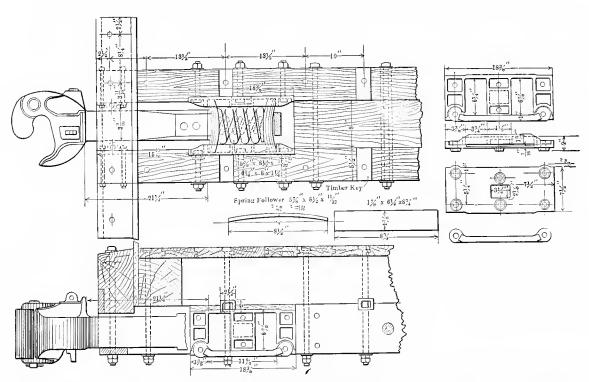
Hinson Single Spring Draft Gear with Spring Follower Plates for Freight Cars with Wooden Center Sills. National Car Coupler Company.
